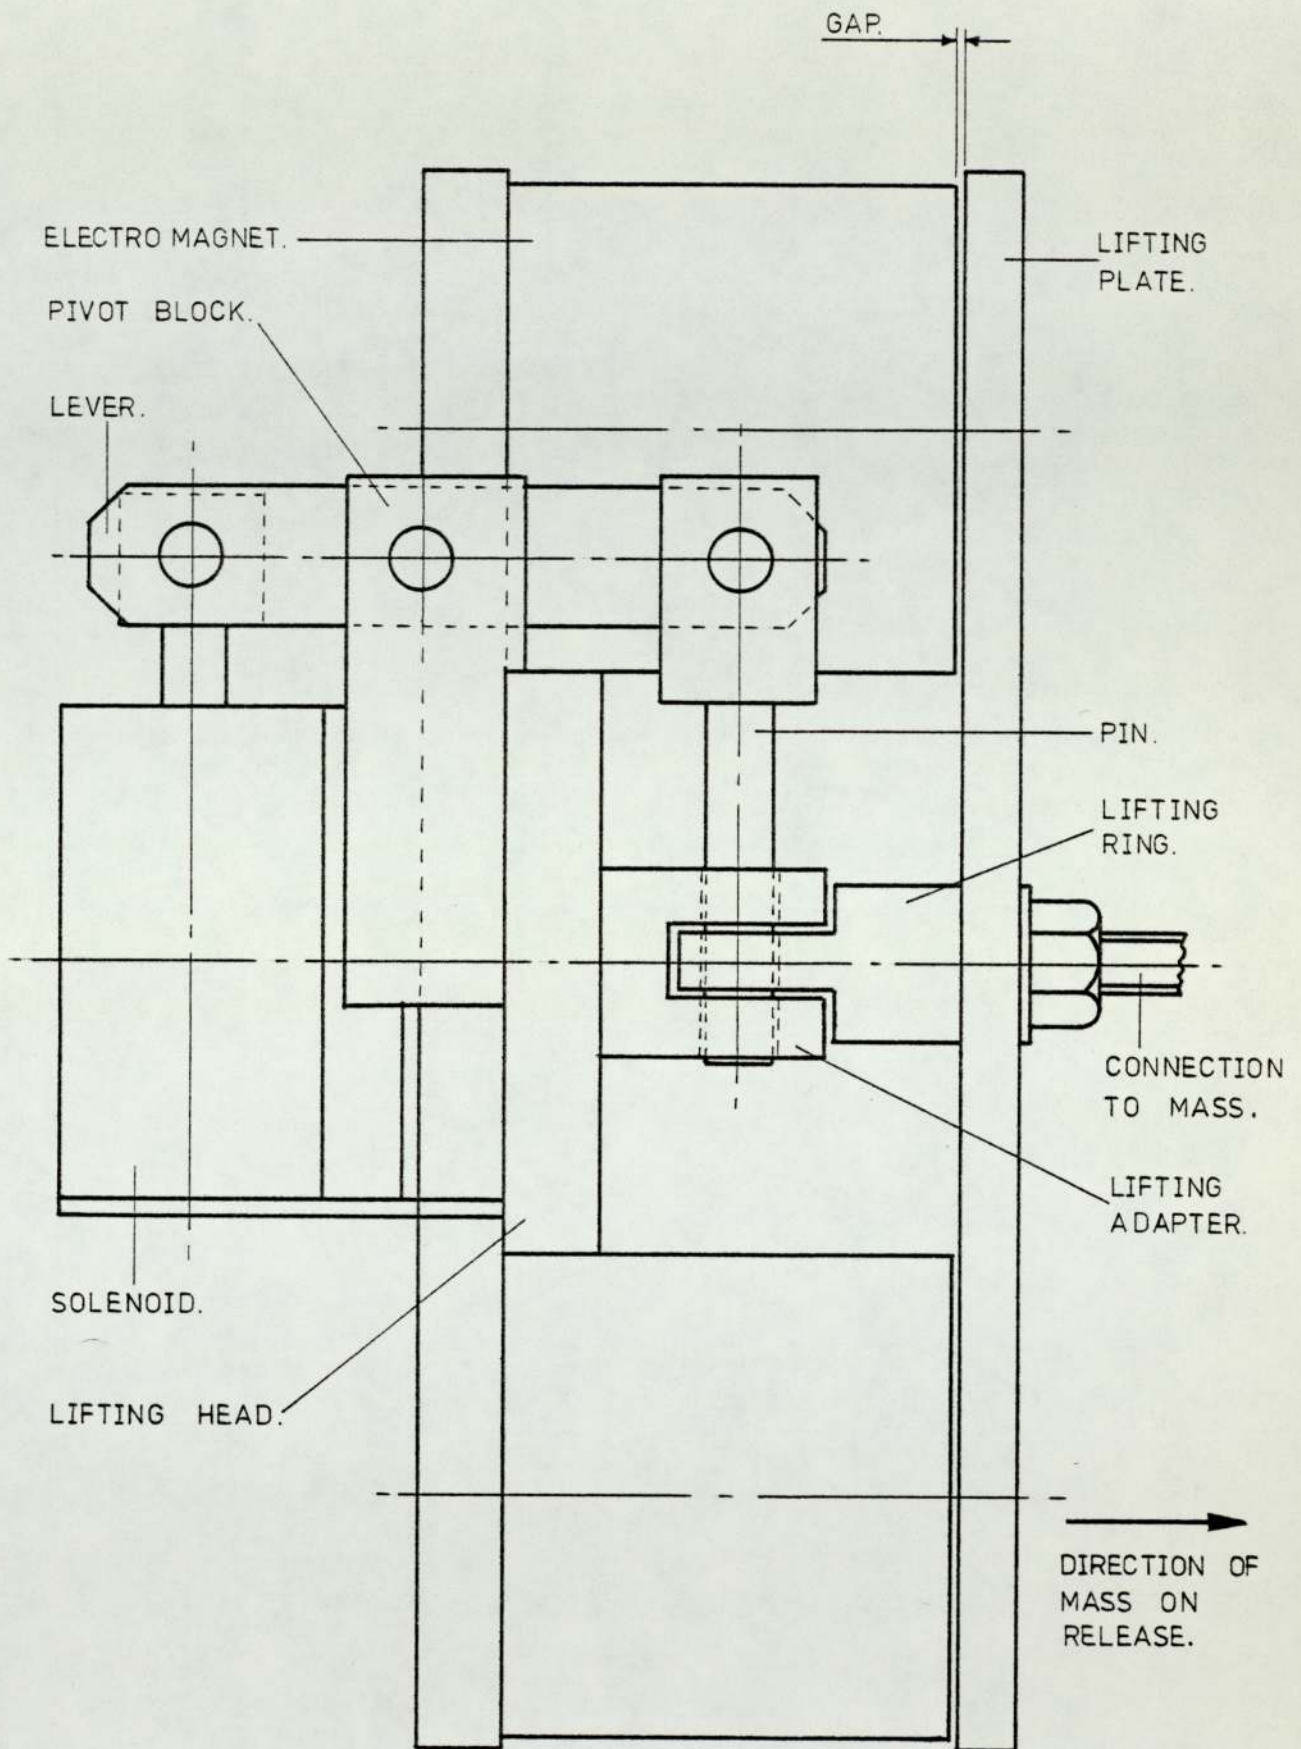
CONFIGURATION OF RELEASE MECHANISM.
